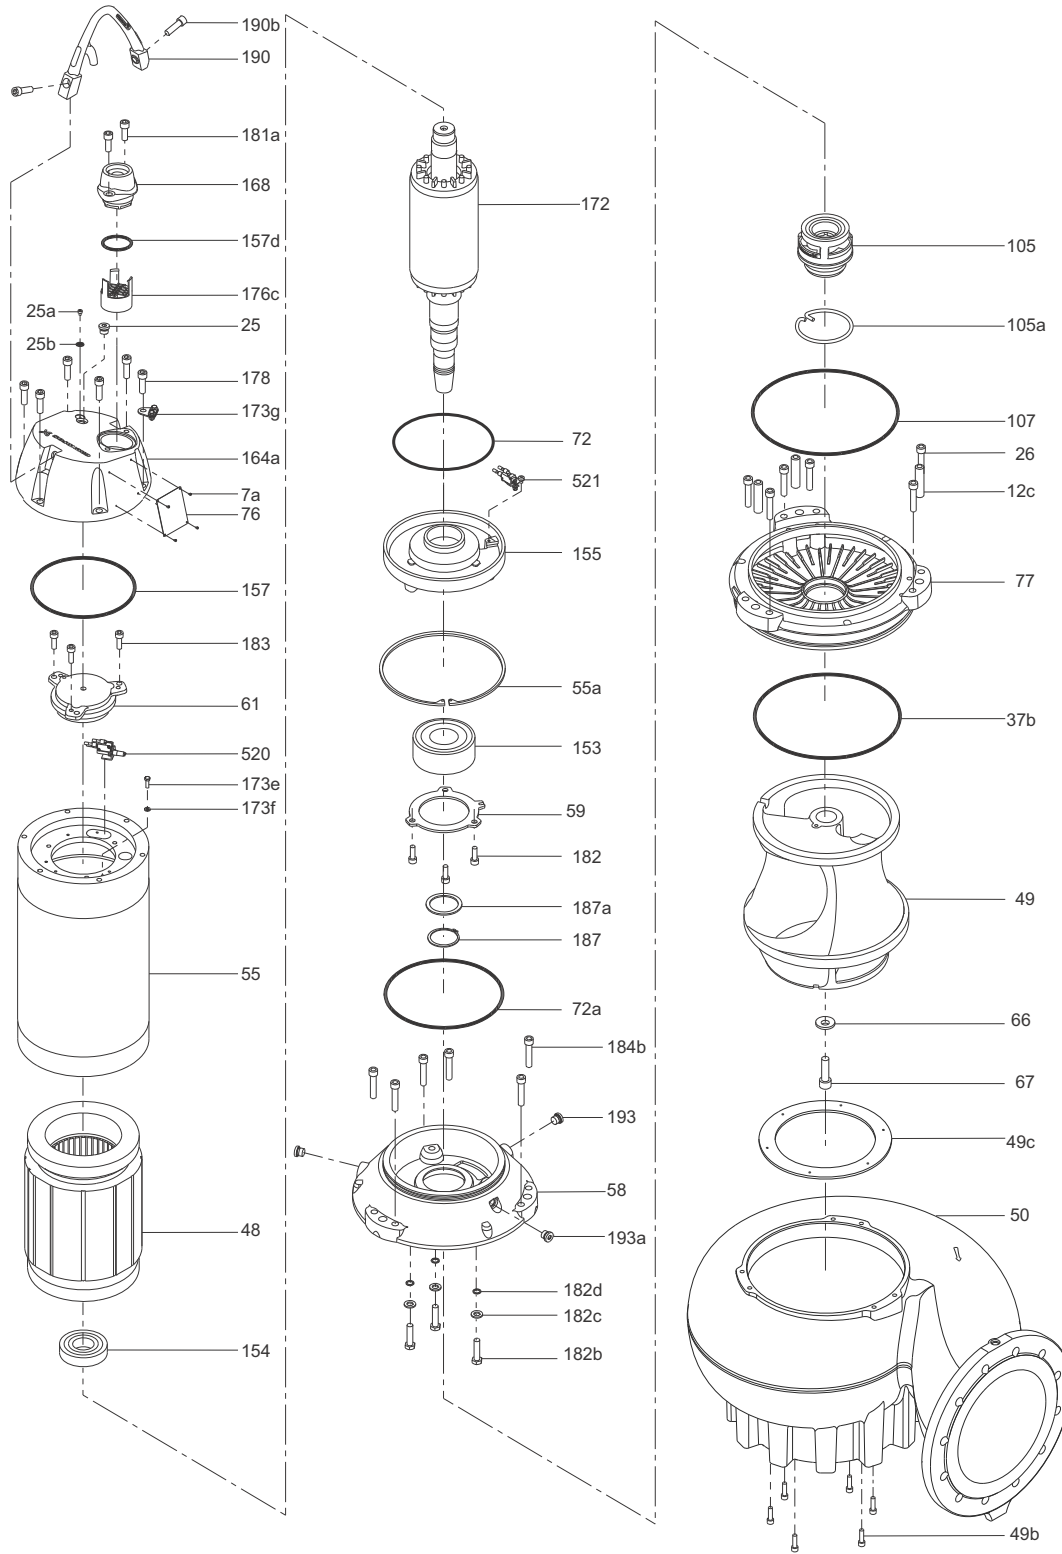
Exploded view, SL pump, explosion-proof version, 6-poles
